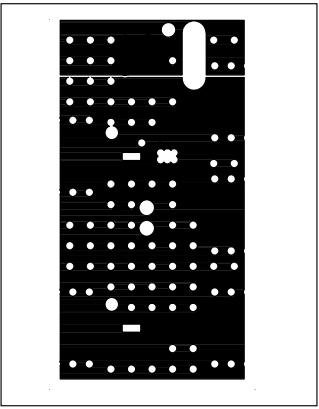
MAX3277 EV Kit PC Board Layout—Power Plane
